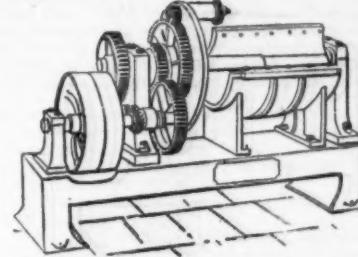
MACHINE FOR BORING THE INSIDE OF THE CURVED PLATE.
